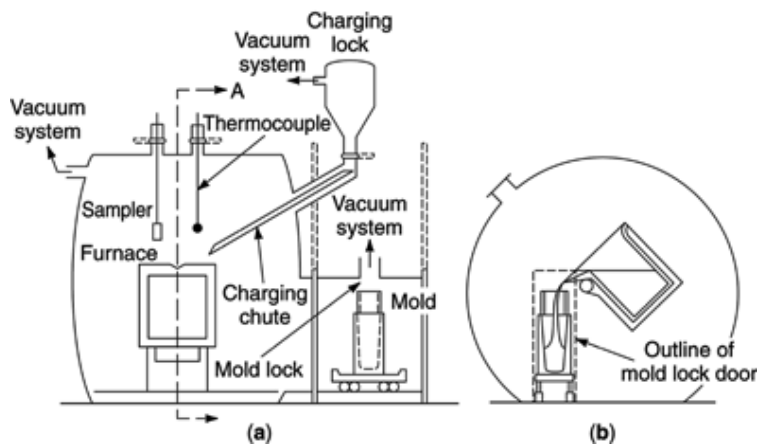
Schematic arrangement of a furnace in a vacuum chamber equipped with charging and mold locks for vacuum induction melting (1): (a) front cross section; and (b) section A during pouring.
